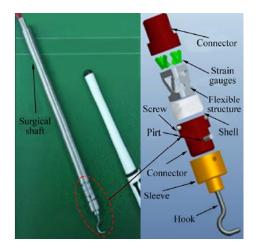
Assembly of the sensor in a surgical tool [20]
